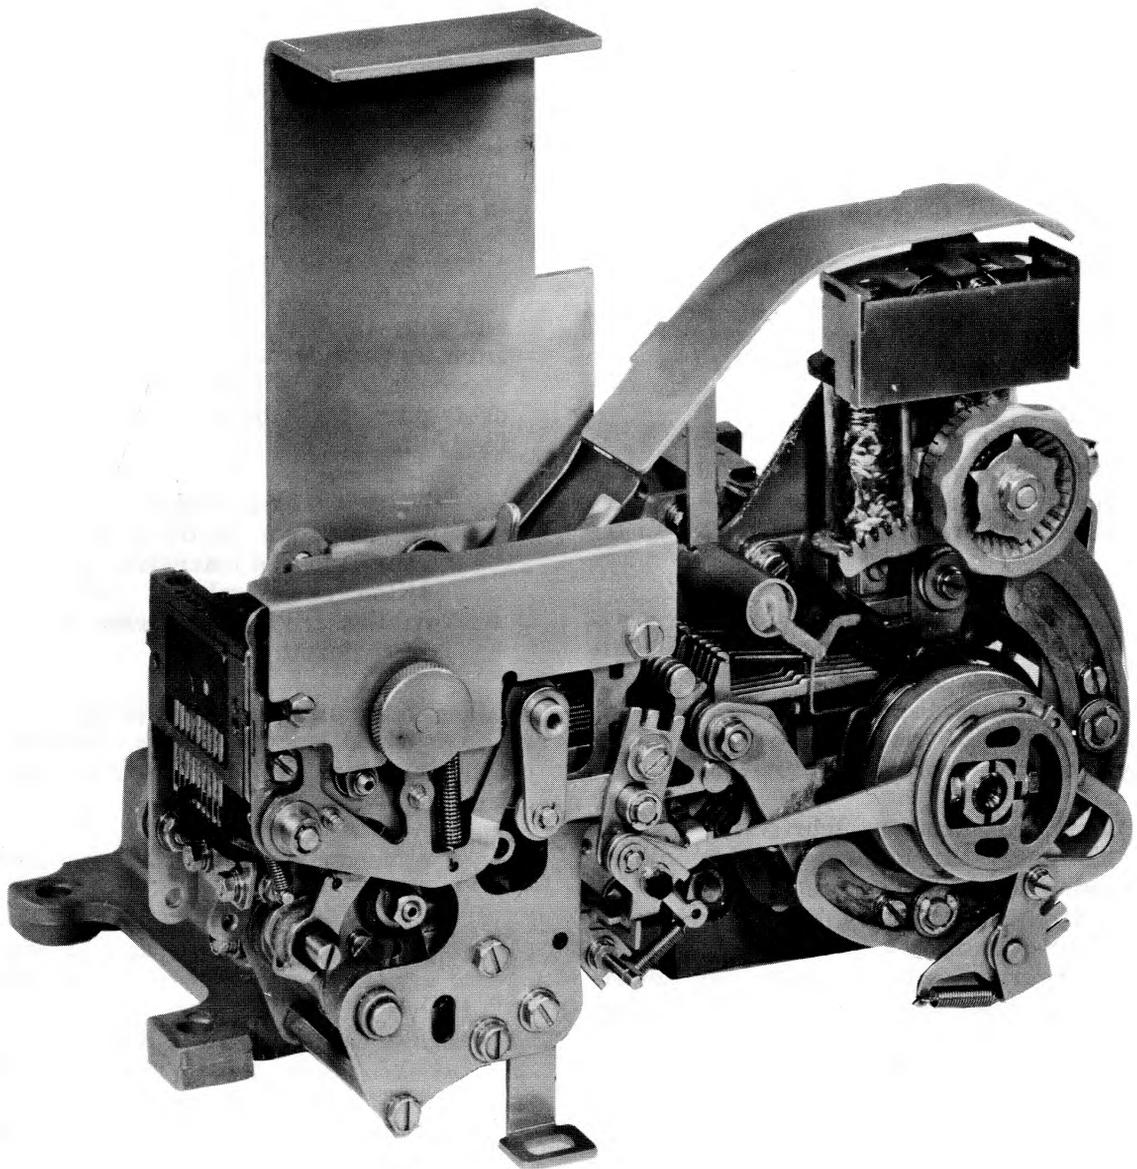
35 Non-Typing Reperforator - Left Front View
